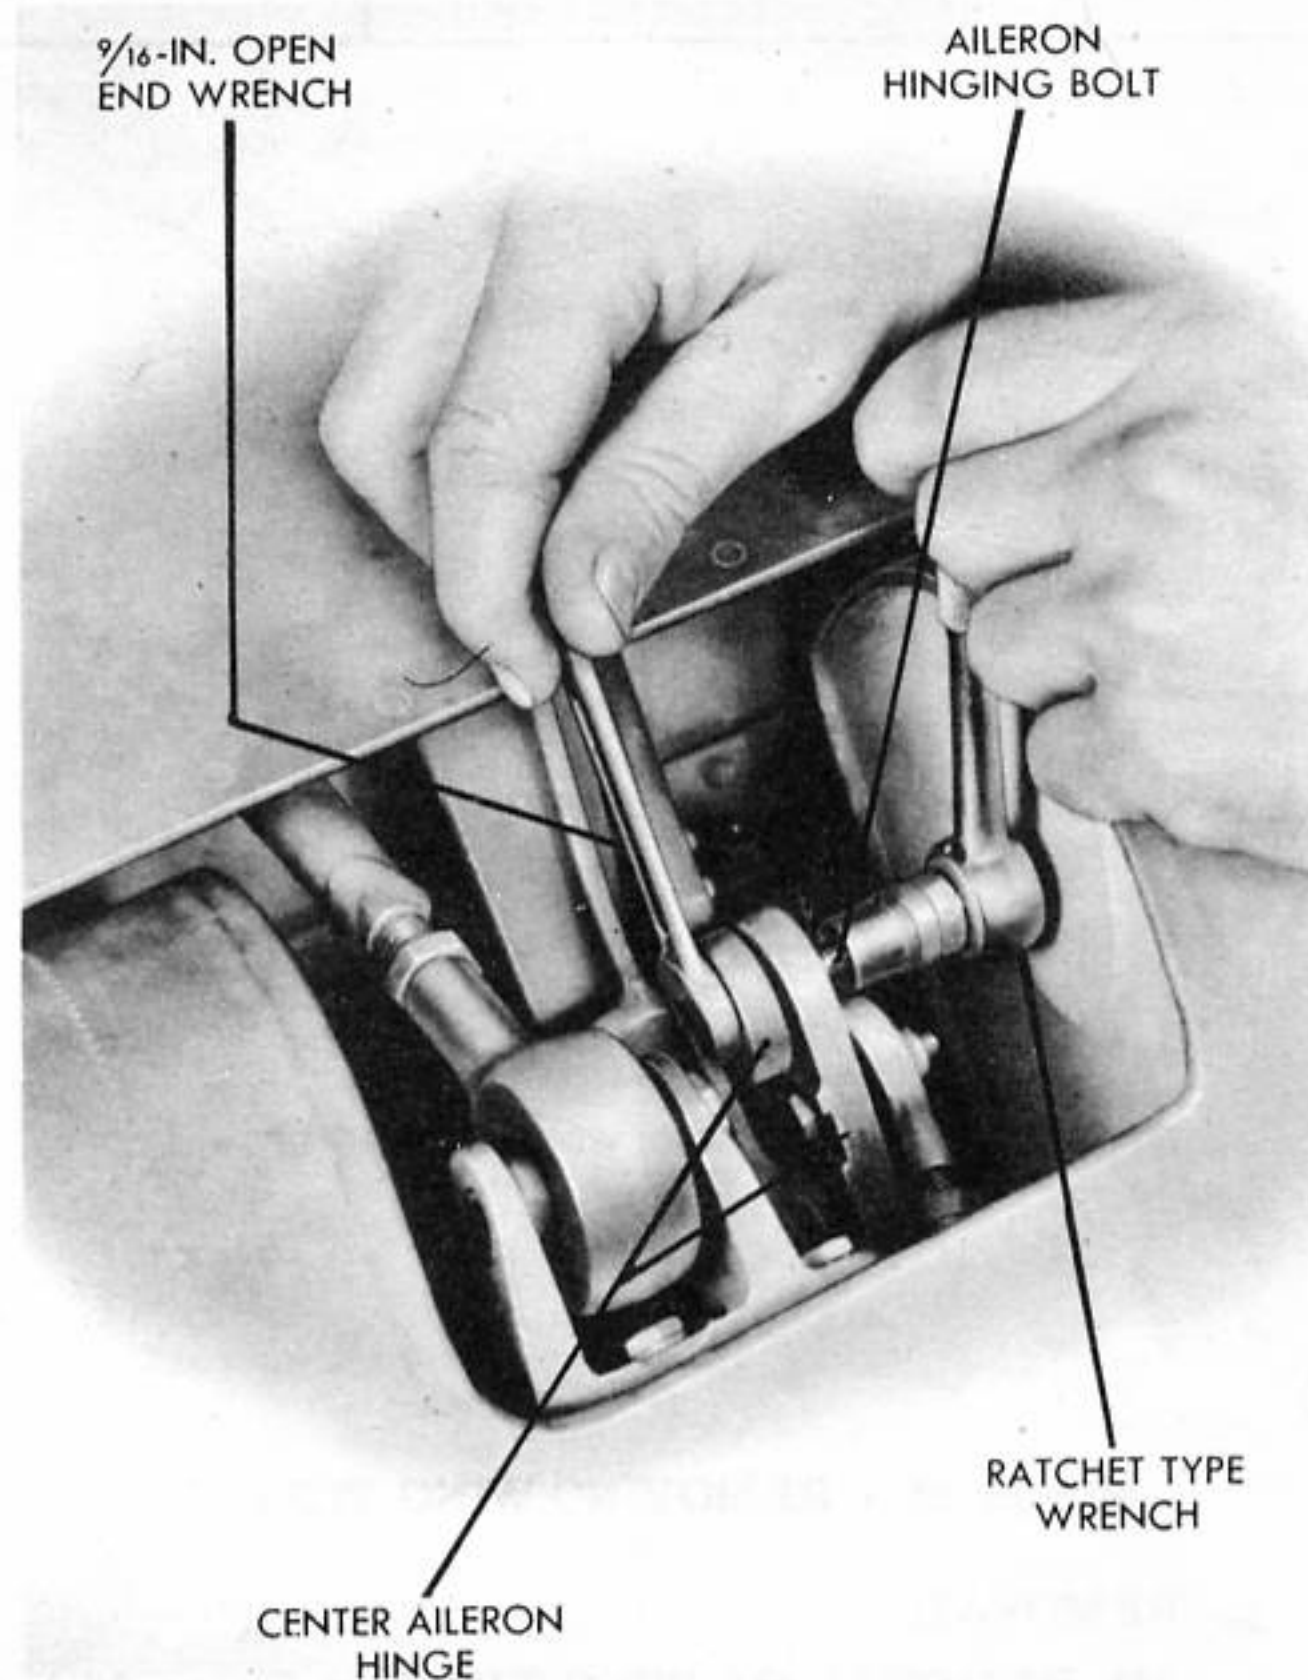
REMOVING AILERON INNER HINGING BOLT
